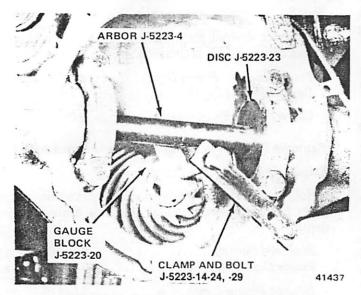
F-38 Installing Pinion Depth Gauge Tools
